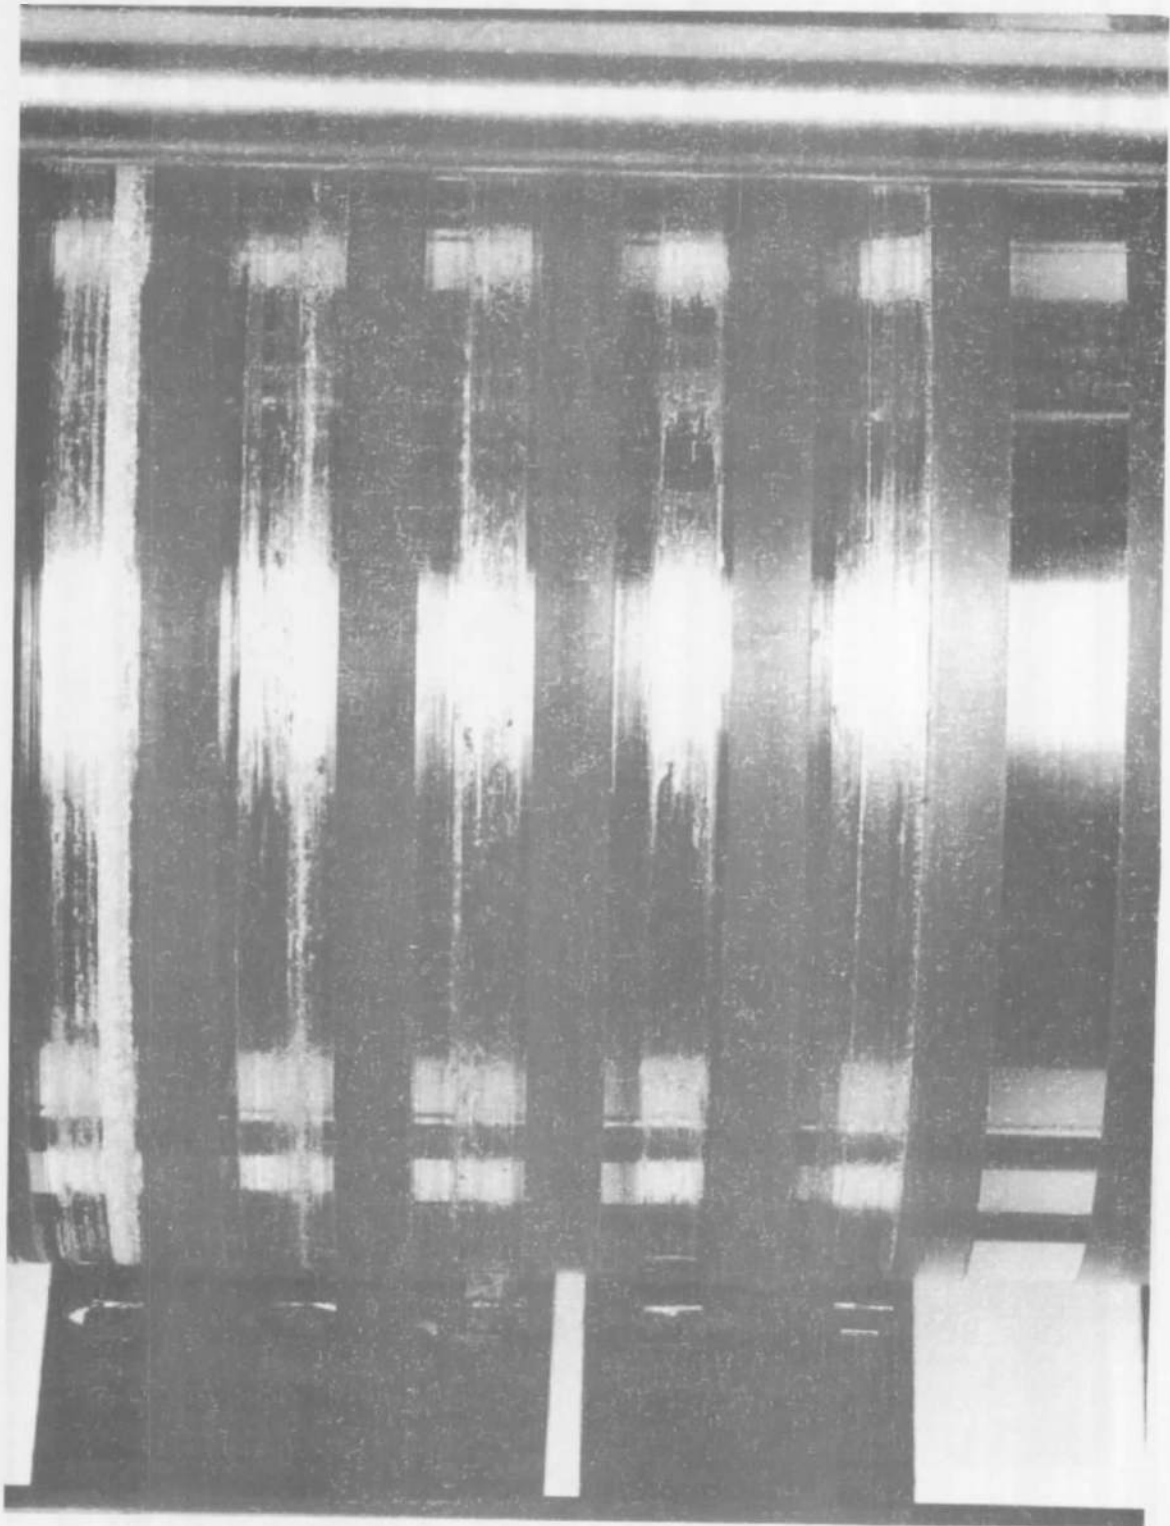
Detail at Positions 13 Through 17 and Unnumbered Position of Assembly 2 After Testing
